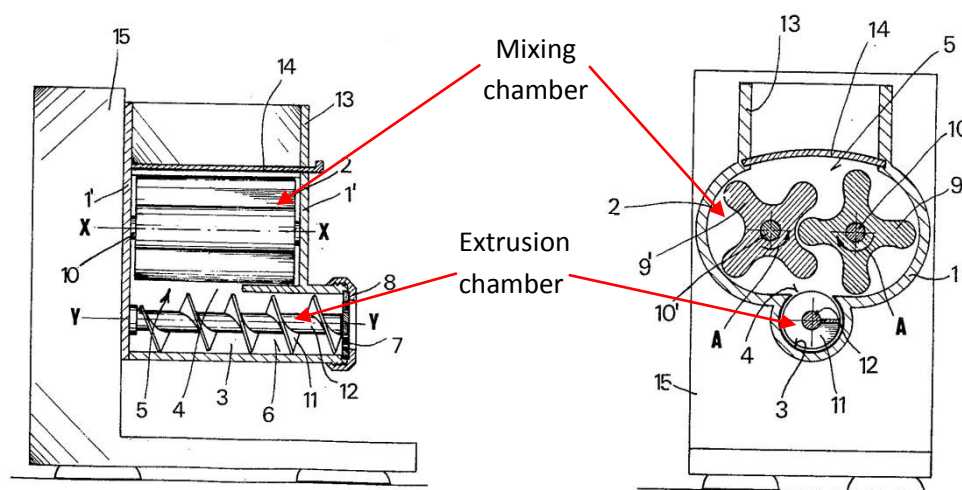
Cross-sectional depictions of the pasta making machine [39]
